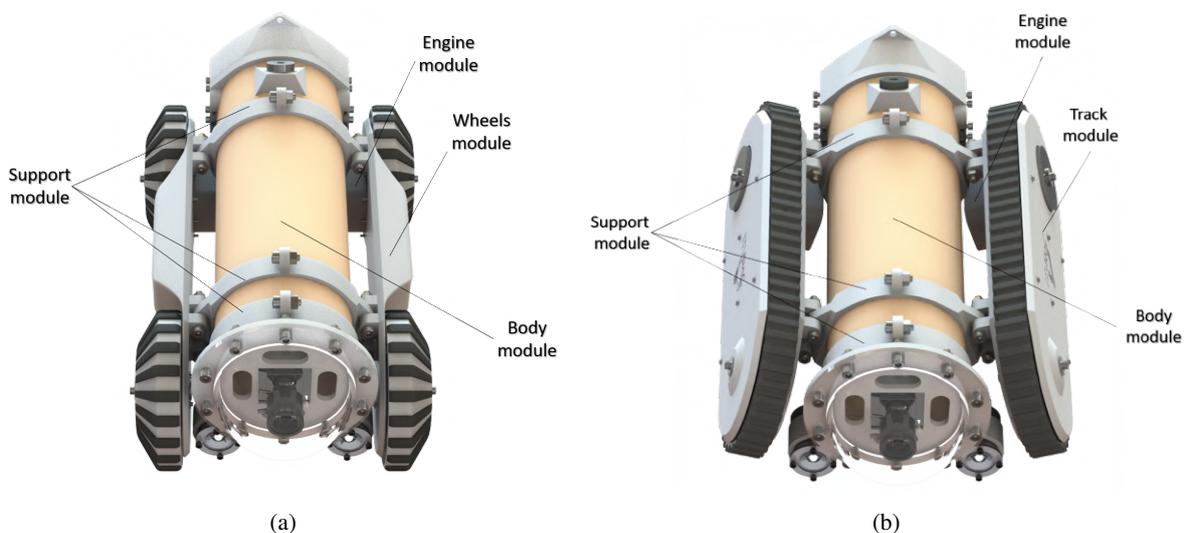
Robot assembled with (a) wheels and (b) tracks locomotion system.
